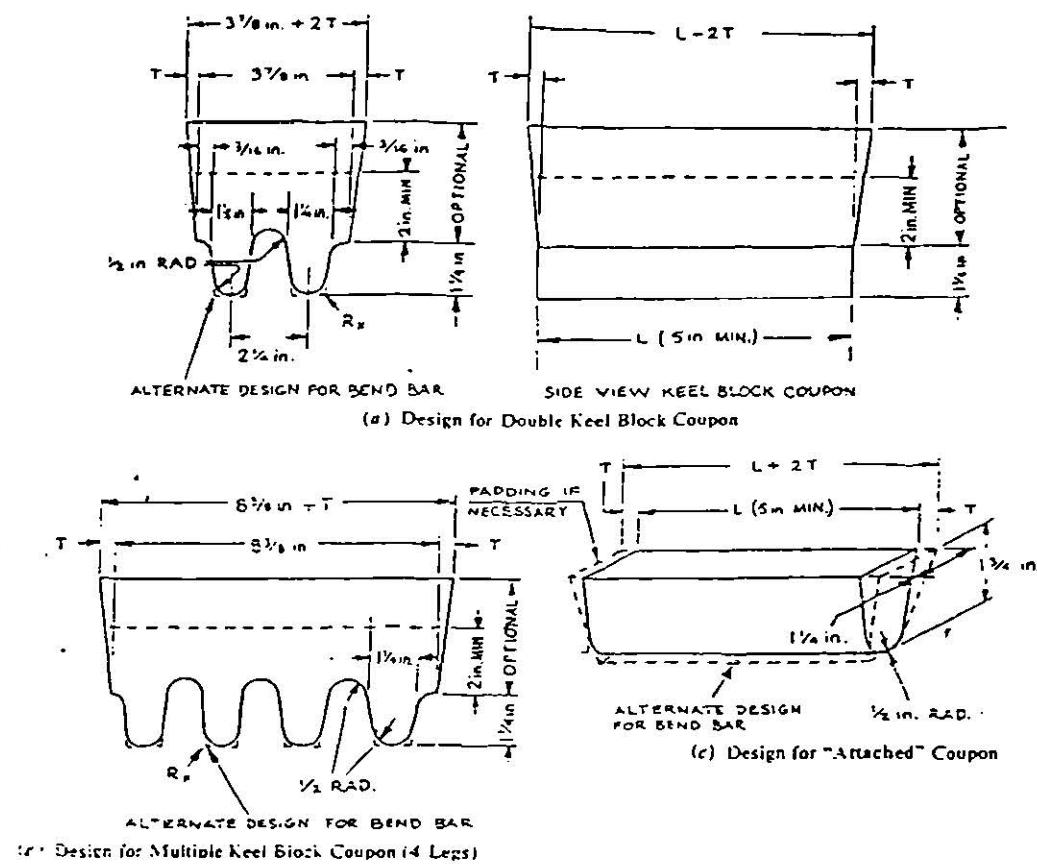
Test Coupons for Castings (see Table 1 for Details of Design)
